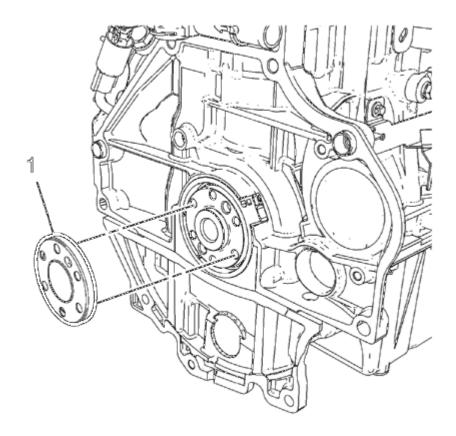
Crankshaft Position Reluctor Ring Courtesy of GENERAL MOTORS COMPANY
